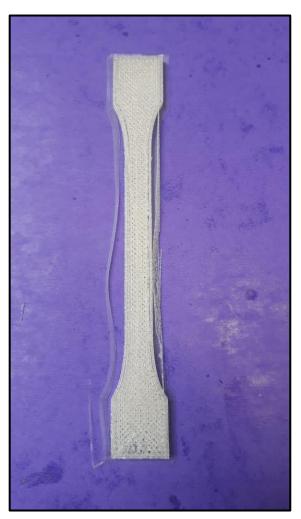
Fifth 3D printed piece with the extruded Pellethane 2102-90A filaments
